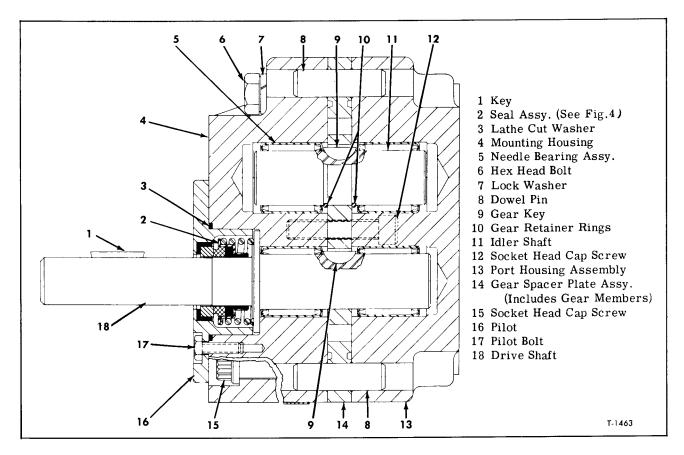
Sectional View of Condenser Fan Drive Hydraulic Pump
